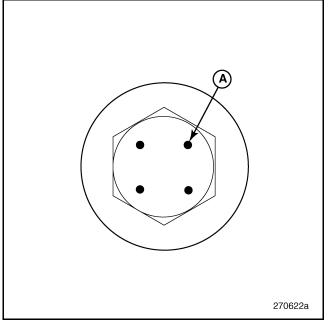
Connecting Rod Screw with Maximum Punch Marks (Replace)
